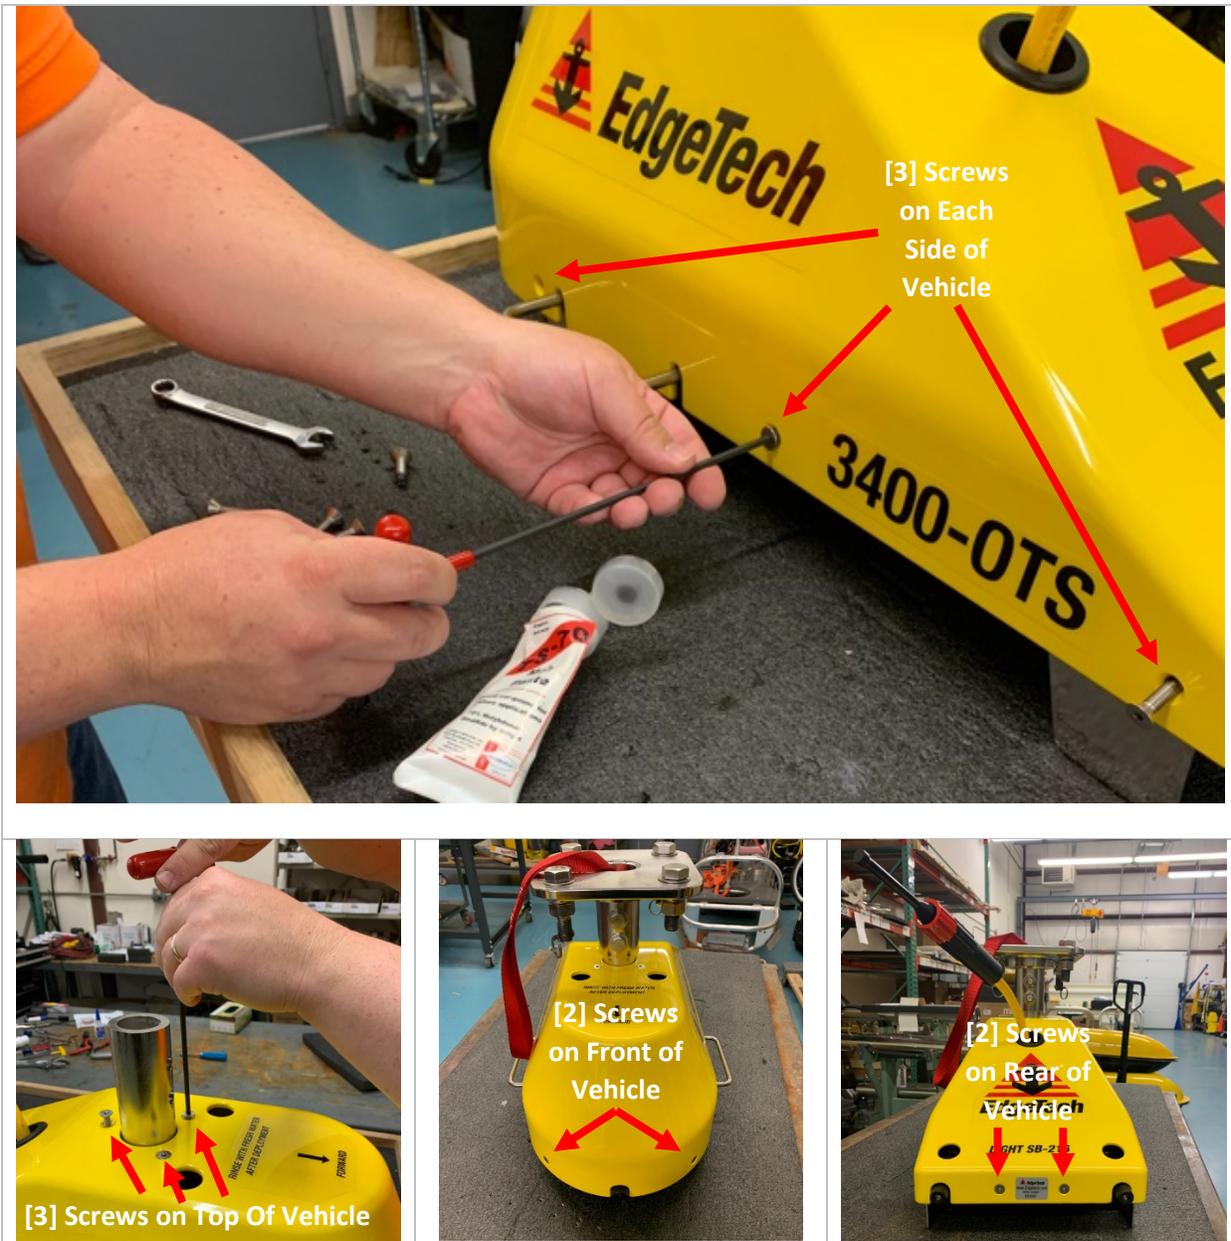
3400 OTS Light and Ultra-Light Vehicle Shell Removal - Unthread [13] Mounting Screws
